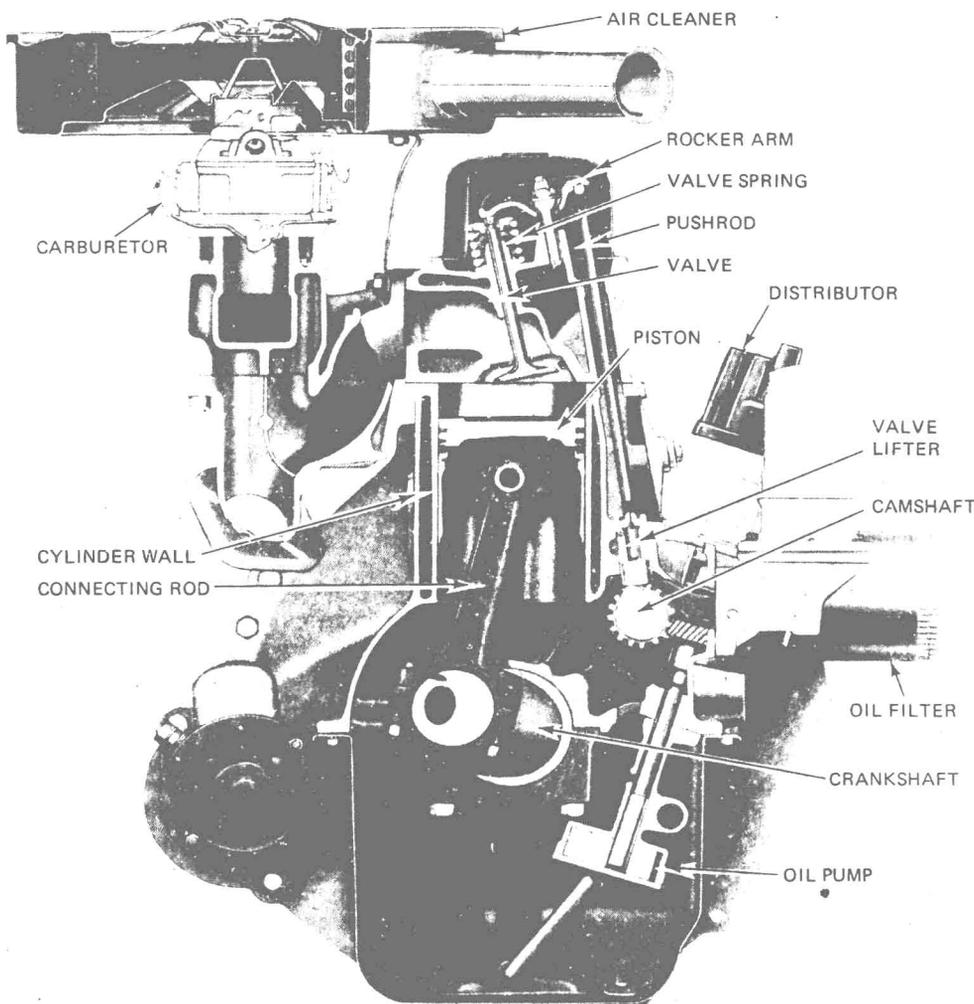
Cross-sectional view of a six-cylinder engine. The piston is near the top of its stroke. Both the piston and the cylinder are shown cut in half. (Ford Motor Company)
